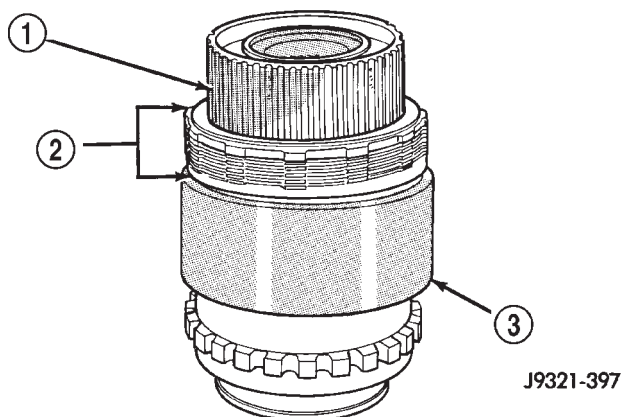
Direct Clutch Pack And Clutch Hub Installation
